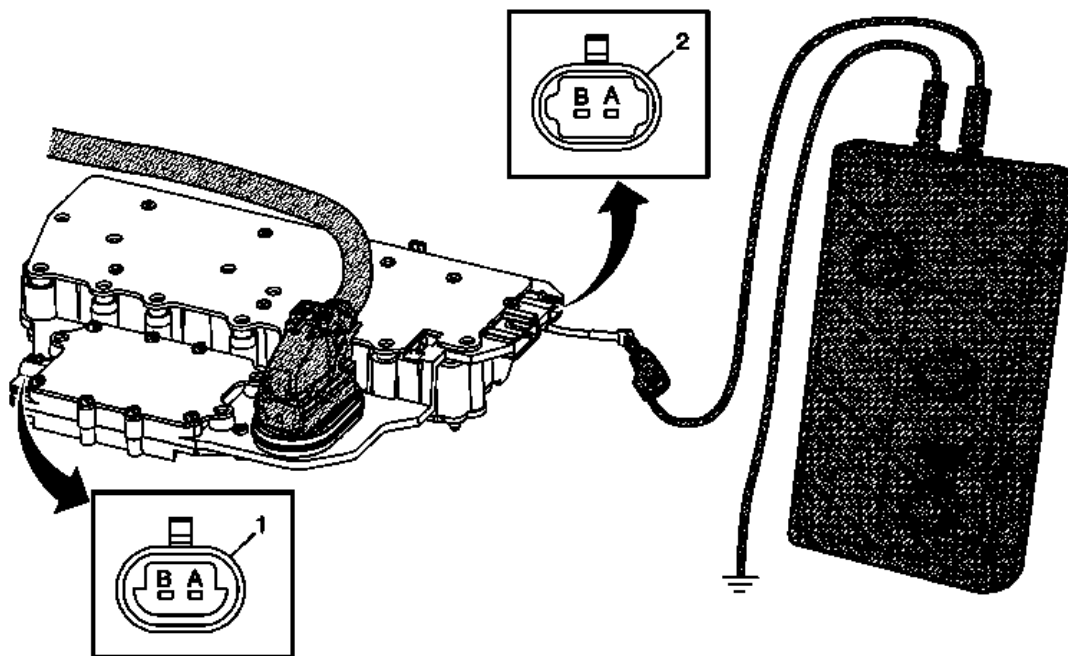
View Of Special Tool & Control Solenoid Valve and Transmission Control Module Assembly
